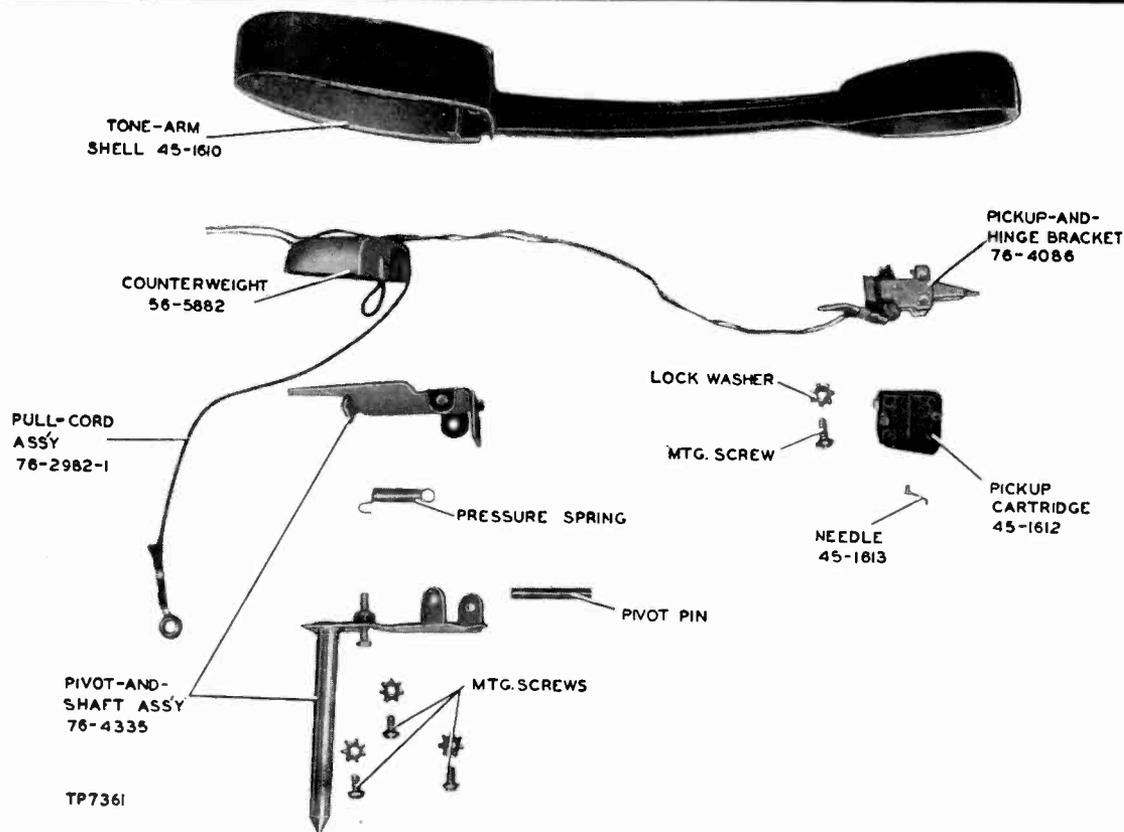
LONG-PLAY TONE-ARM ASSEMBLY (35-2686)
